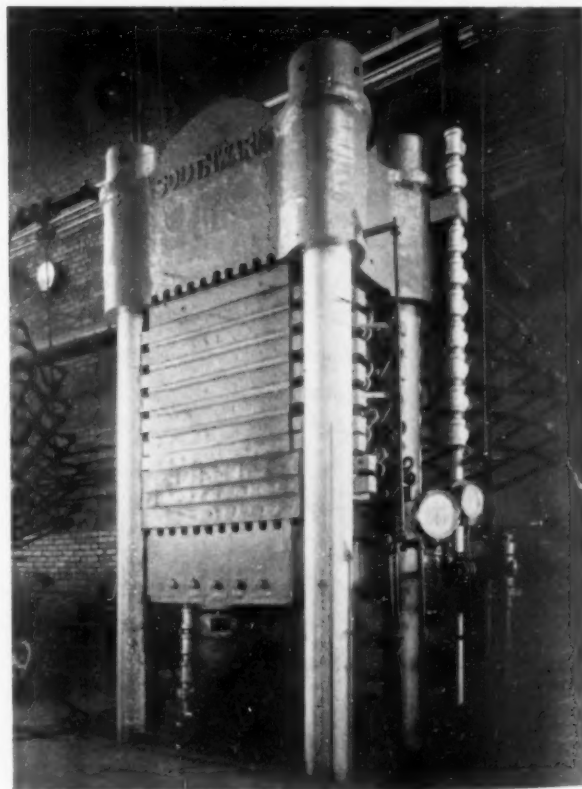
Press used in making laminated sheet stock from layers of resin impregnated cloth or paper.
